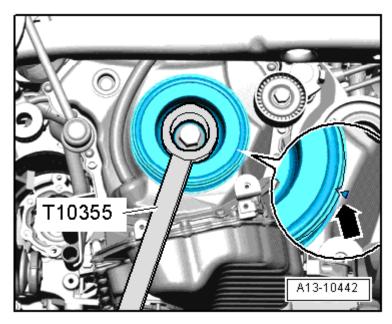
Identifying Vibration Damper Rotated Into "OT" Position Using Counter Hold Tool T10355
